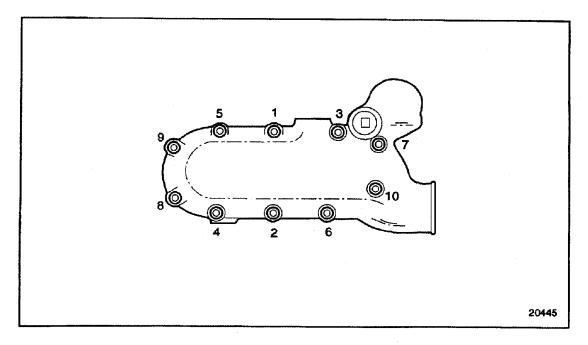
Oil Cooler Housing Bolt Torque Sequence
